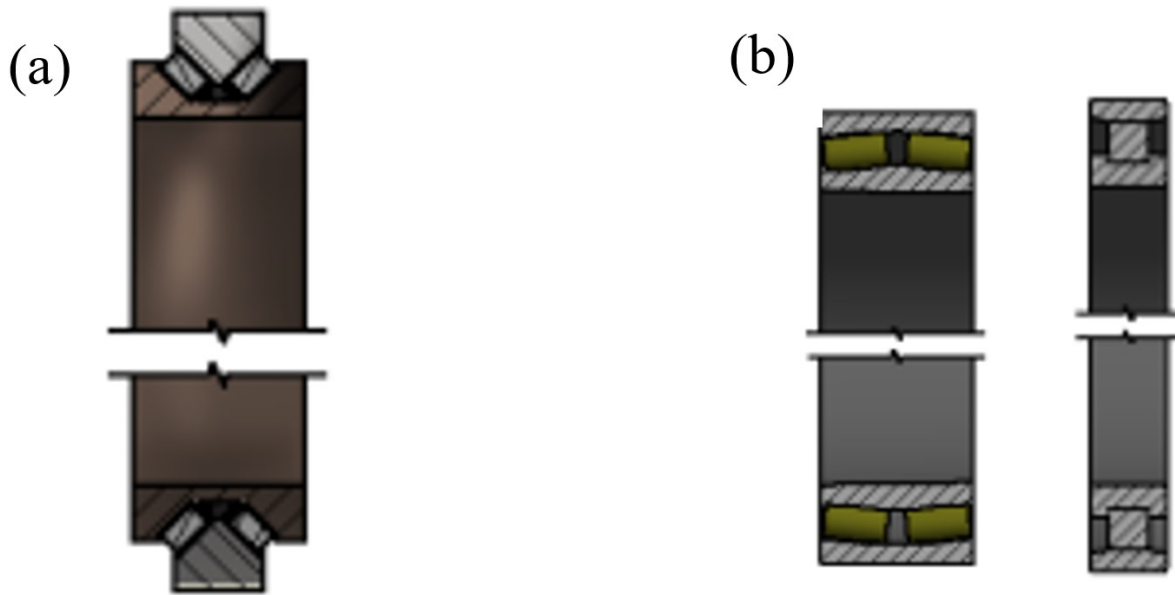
In (a) A single bearing model. In (b) a double bearing model.
